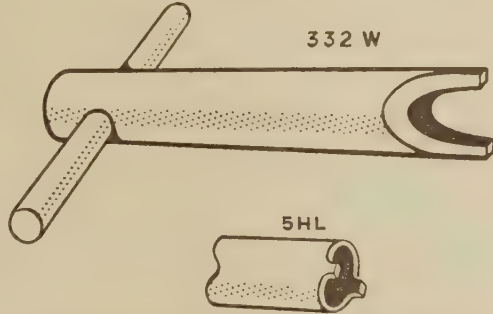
Special Tools for Dismantling the C.A.V. Axial Starter.
